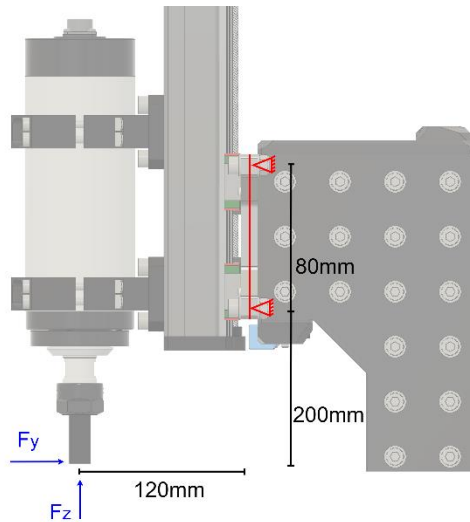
XY plane of the machine, where the Z tower plate can be observed. Both Y and Z forces are represented along with their offsets to the mounting screws.
